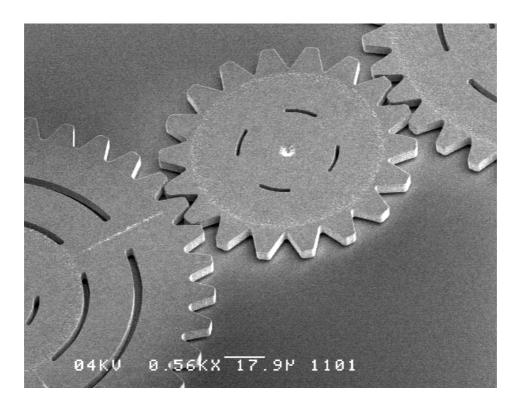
Close-up of the gear teeth. The gear teeth have a thickness of 6 μ m, a depth of 11 μ m and a diametrical pitch of 18.5 μ m.
